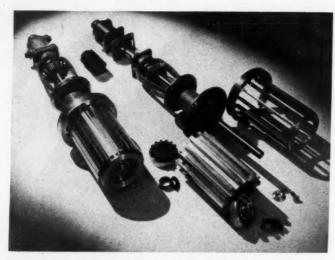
Aluminum drying reel, assembled and disassembled. Principle of thread advancing on this reel is the same as on the plastic process reel, but several other aspects of its design are different
